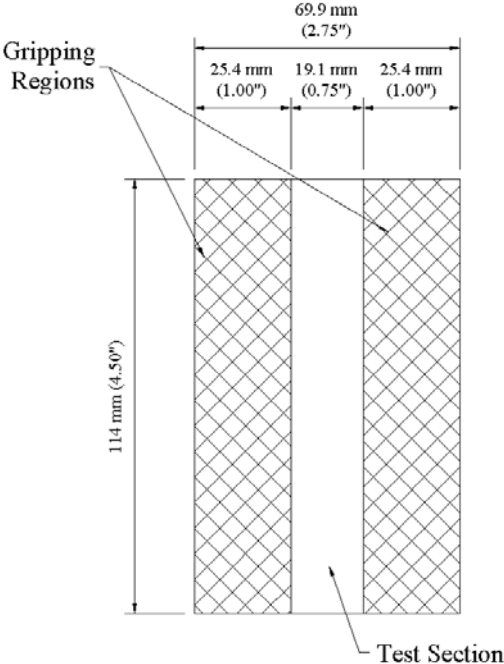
INITIAL RECTANGULAR SPECIMEN INVESTIGATED
